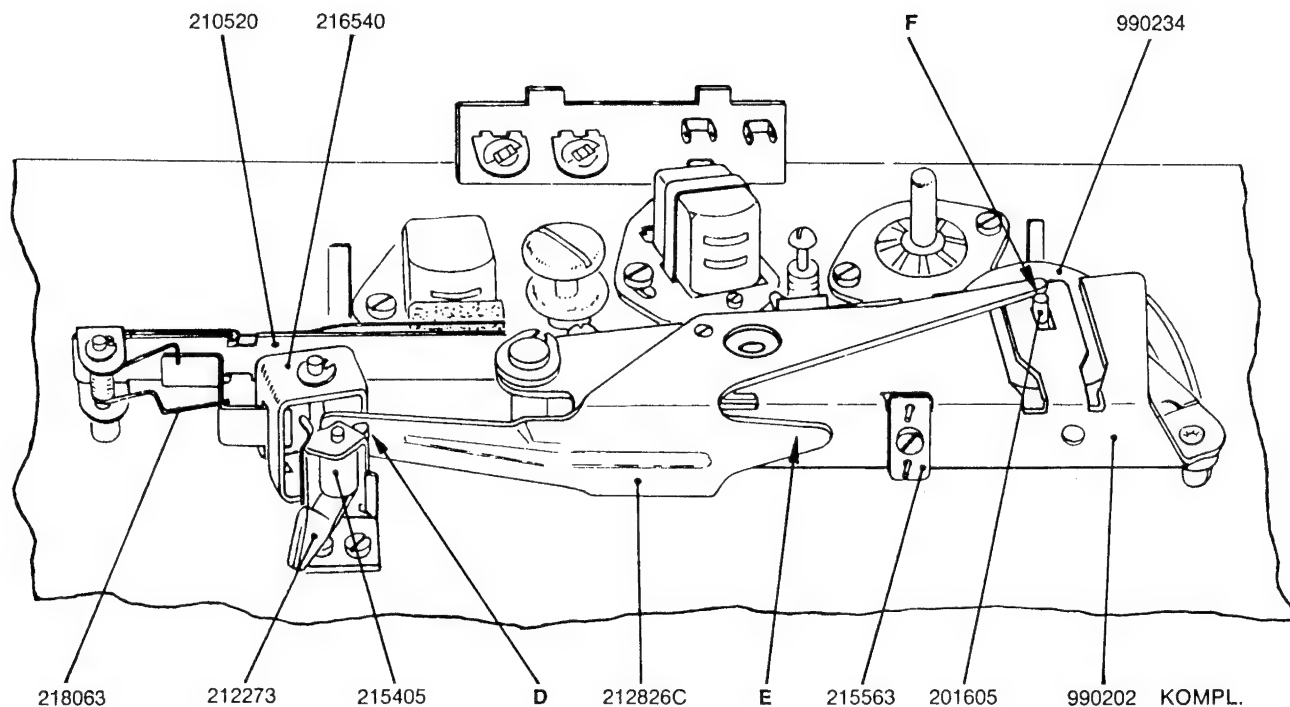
Instantaneous start/stop mechanism with pressure wheel arm assembly.
